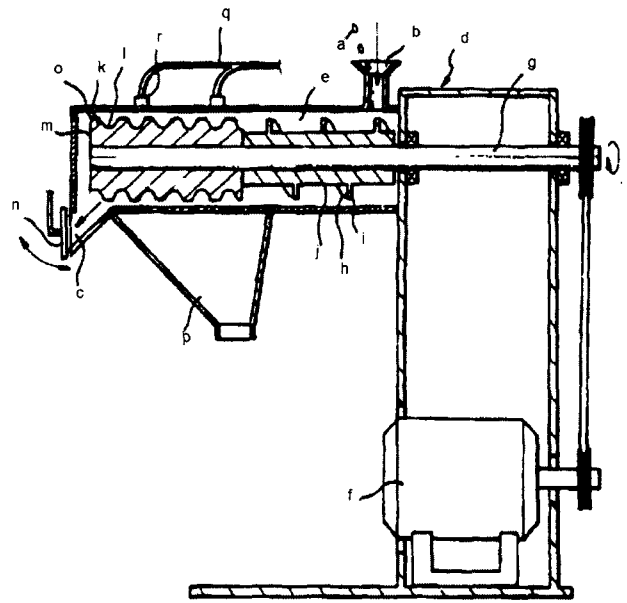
Diagram of newly designed horizontal abrasive-type milling machine.
